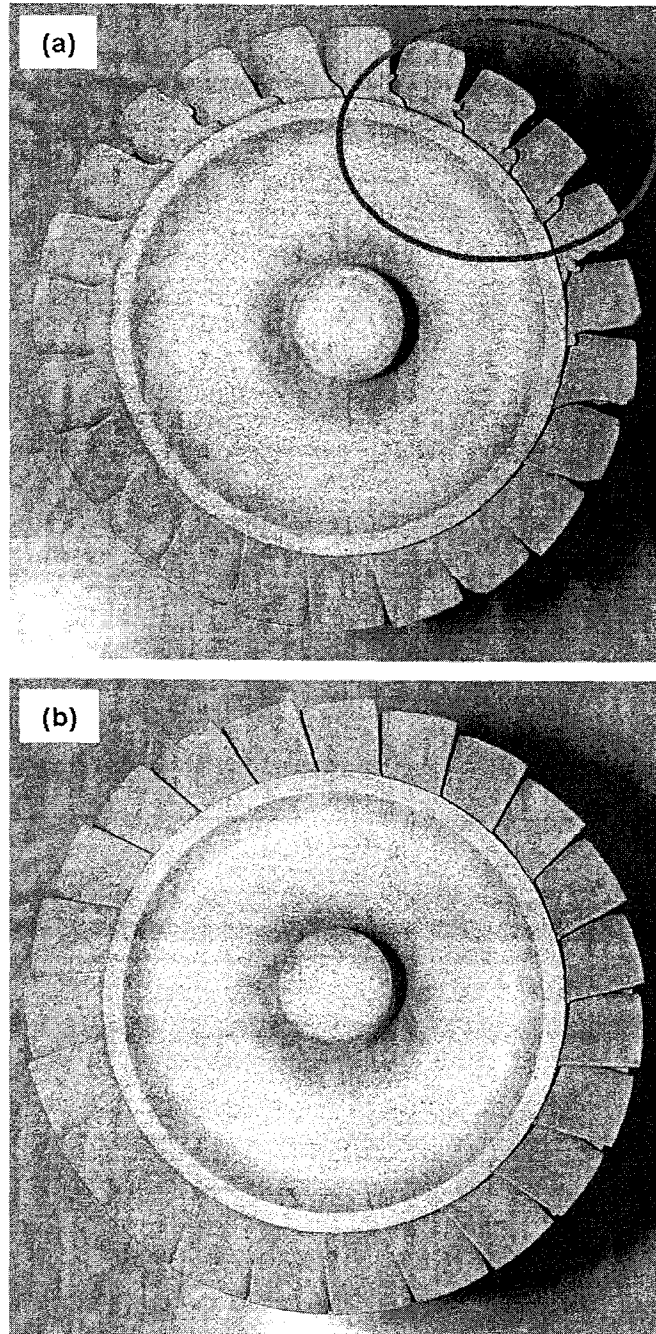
Integral rotor casting. (a) conventional casting process and (b) vibration treated casting process. The circled area in Fig. 1.17(a) shows a typical misrun defect.
